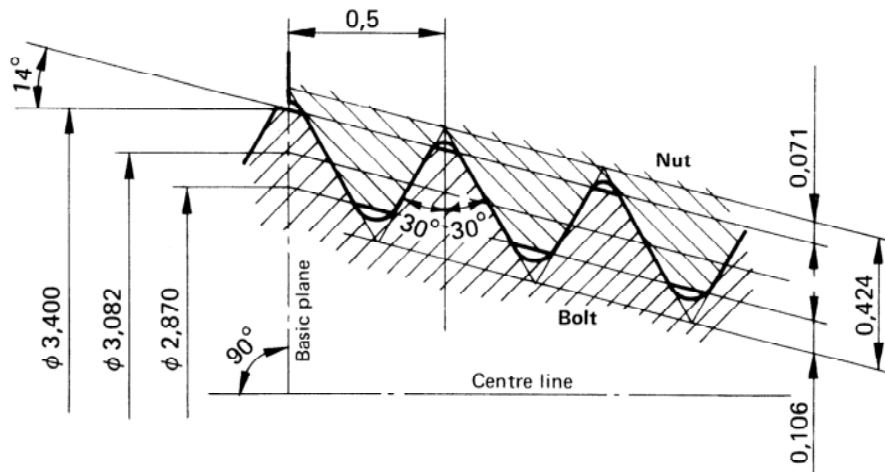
Profile and basic dimensions of tapered threads (nut and bolt)
